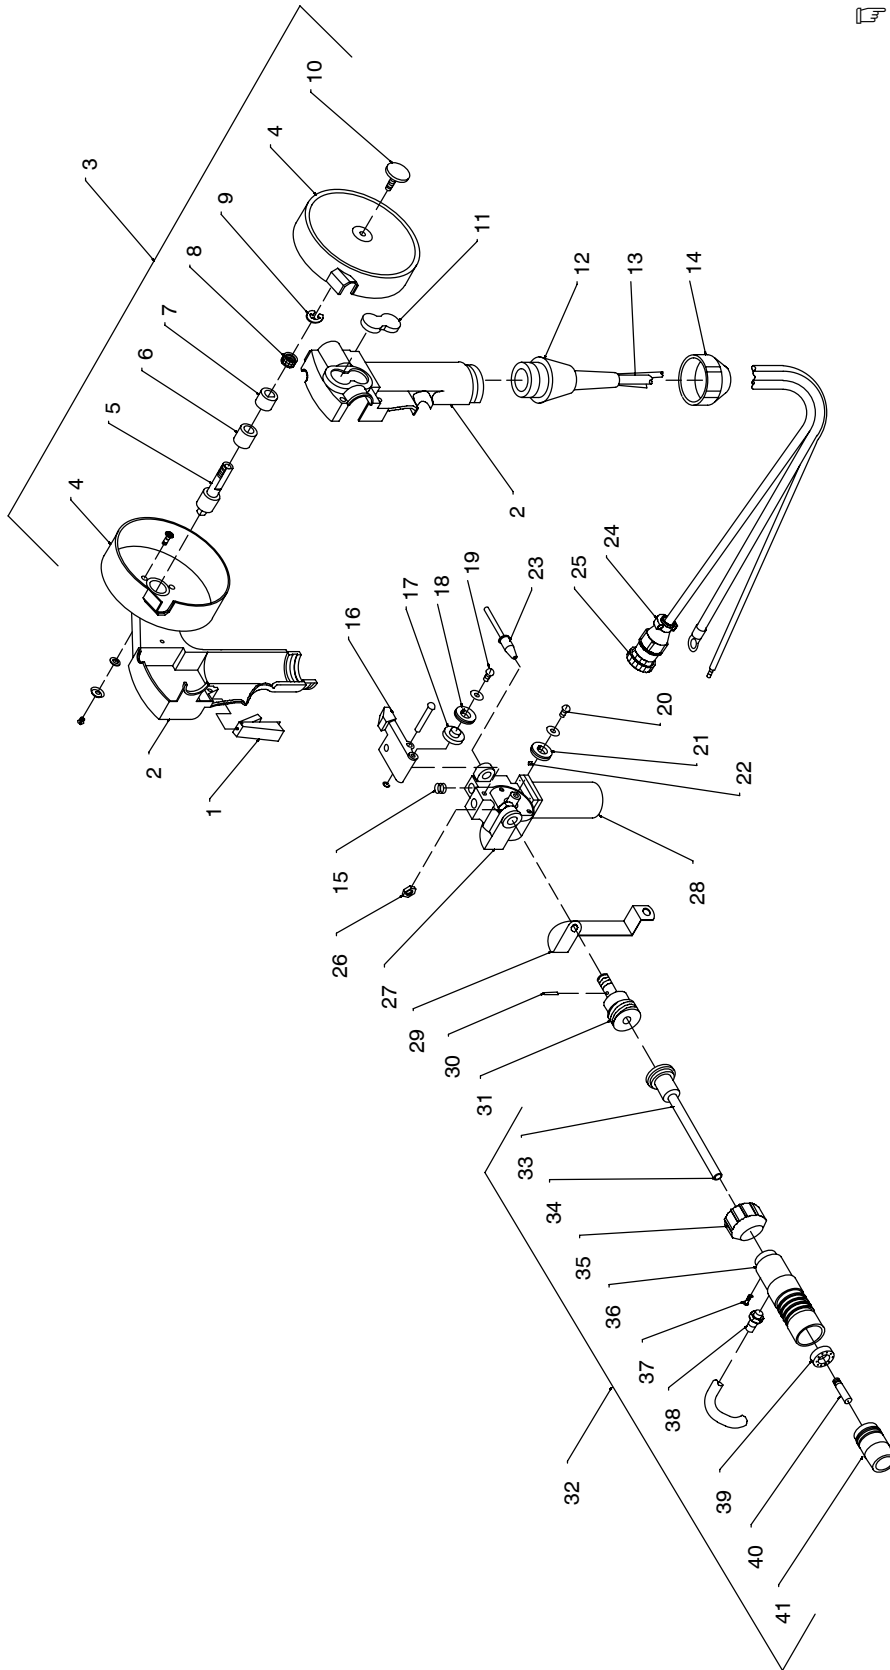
Complete Assembly For Spool Gun 3545-20
